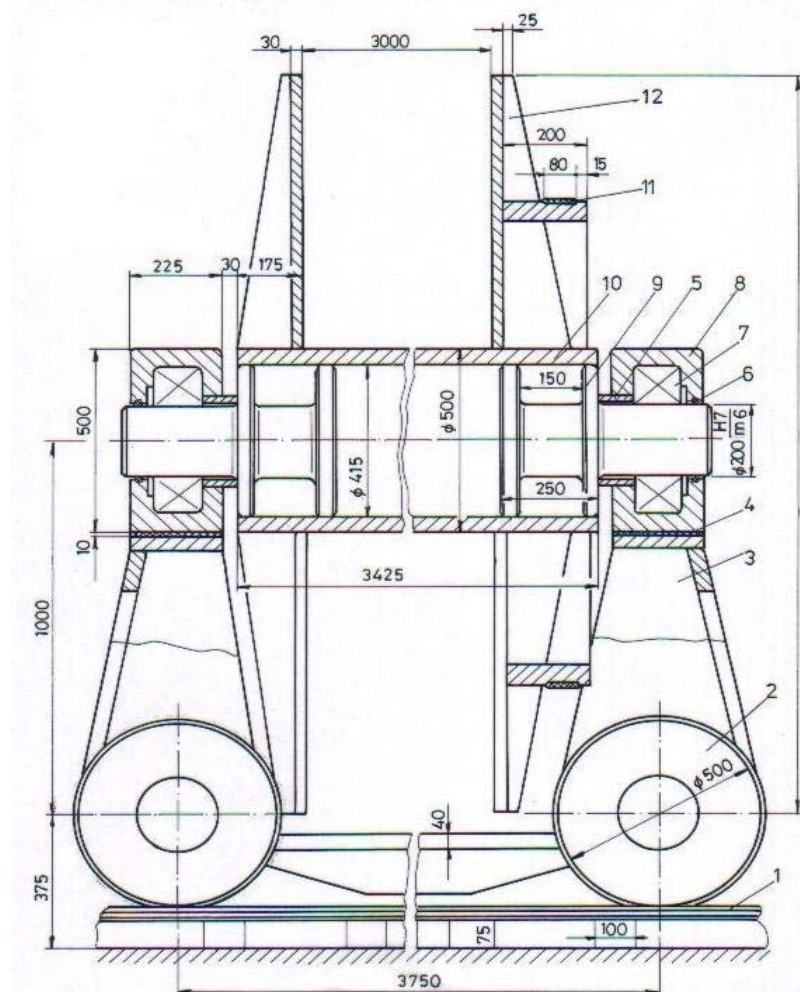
The strap support carriage: 1 – rolling track, 2 – rolling roll, 3 – frame, 4 – insulation support, 5 - spacer, 6 – gasket, 7 – bearing roll, 8 - bearing, 9 – shaft, 10 - pipe, 11 – brake strap, 12 – end plate.
